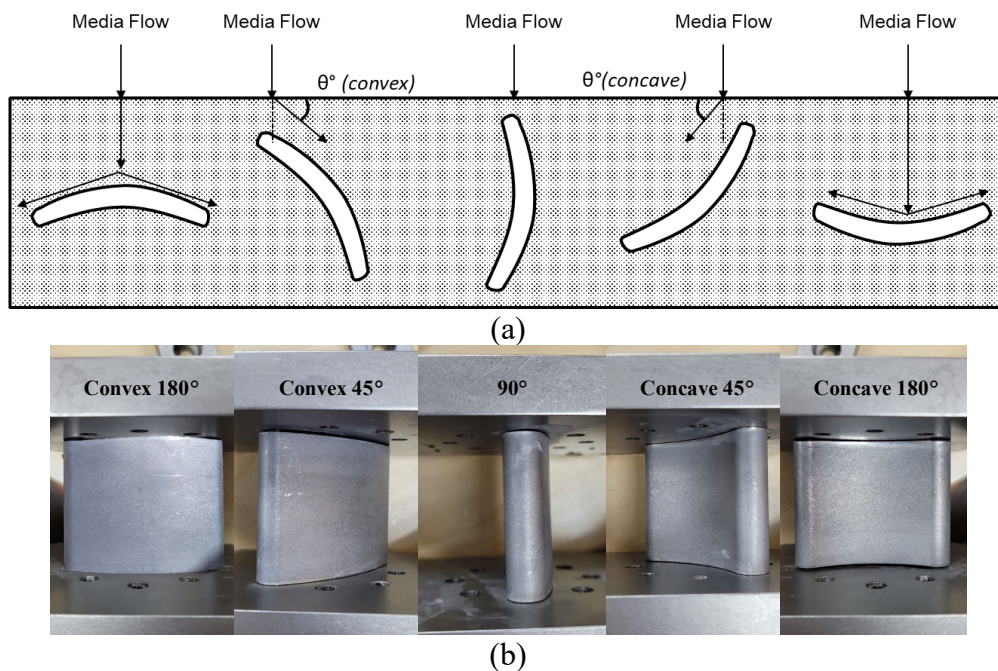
(a) Circular Cross-Section of assembly and (b) Top view of actual setup
